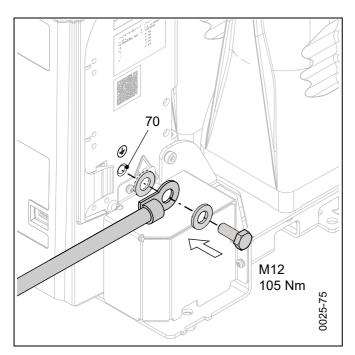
Connecting the earthing conductor to the side of the operating mechanism housing – example with a plastic cover
